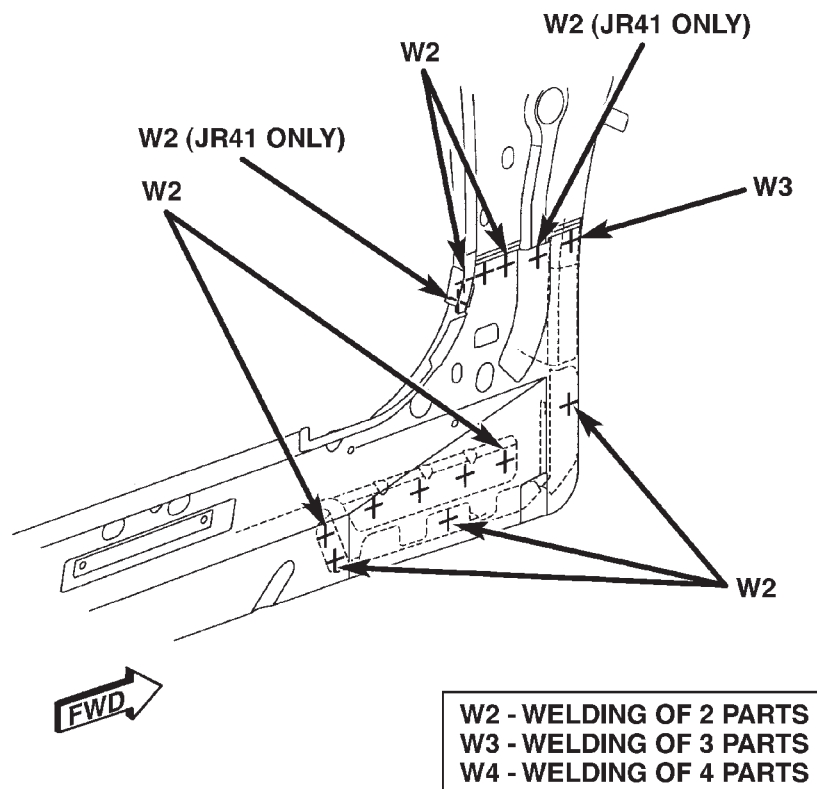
LOWER DECK OPENING REINFORCEMENT TO LOWER DECK OPENING PANEL
